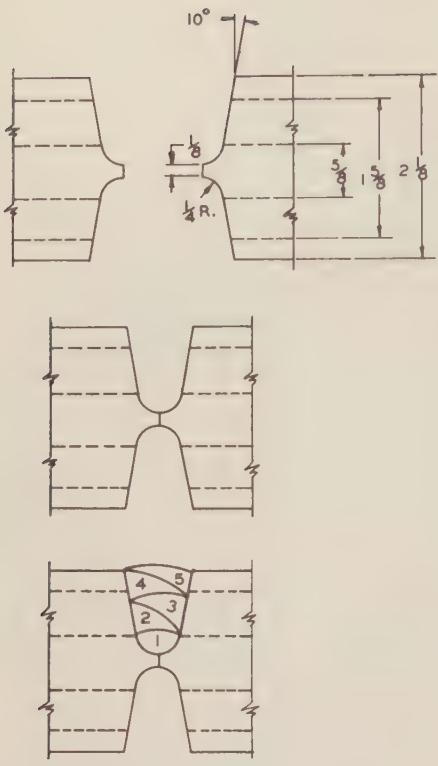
Each stress member is machined for welding on its ends, as shown. The four pieces are assembled, aligned, and tack-welded. Then one channel is filled in by laying in five beads of weld metal successively. This operation, which is repeated on the opposite side, is known as *stringing* and interlaces the beads to obtain maximum strength and reduce the possibility of trapping slag in the weld metal.
